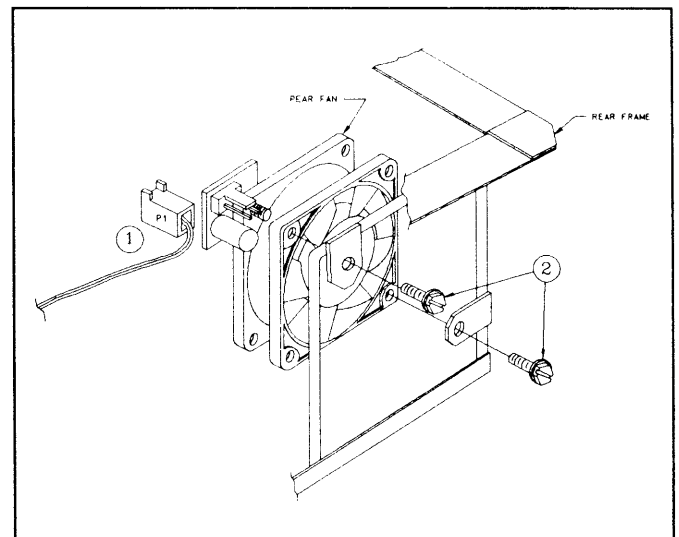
Rear Panel Card Rack Fan Removal
